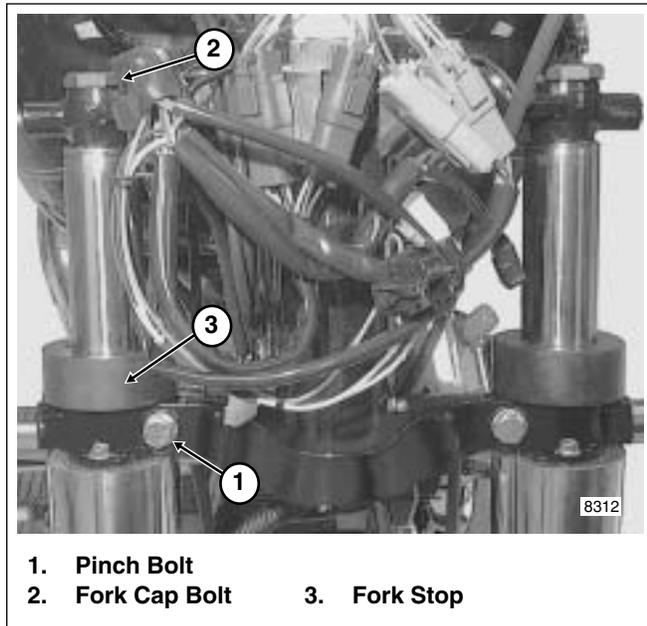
Remove Fork Cap Bolt (FLHR/C/S Shown)
